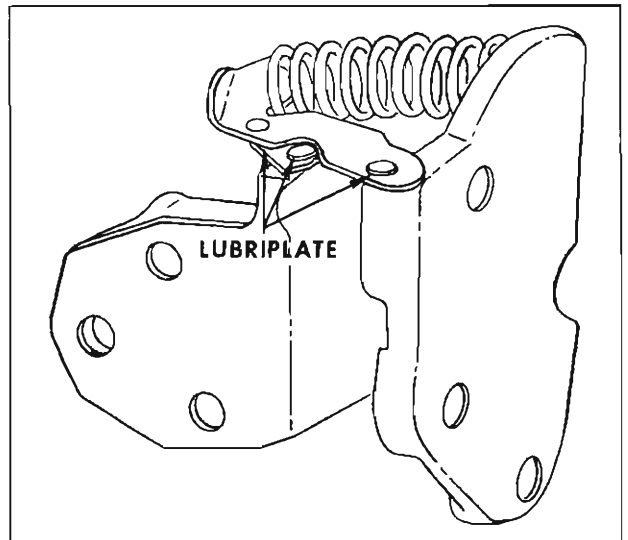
Front and Rear Door Hinge (3000, 3100 & 3200 Series)
